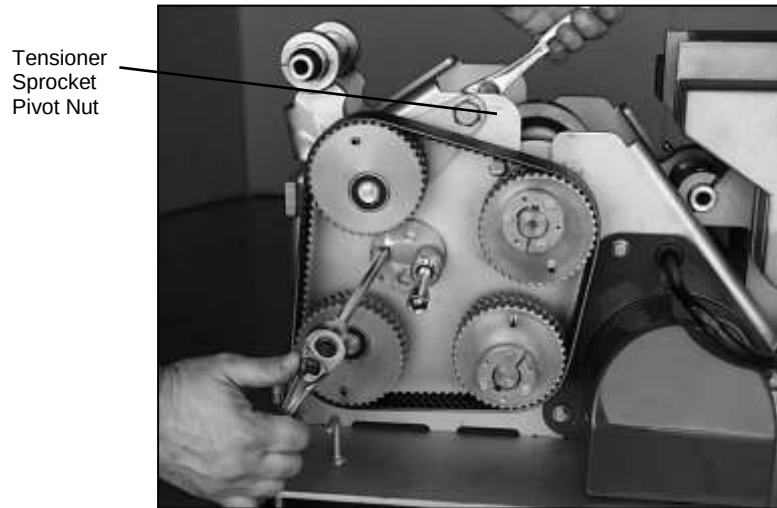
Tightening the Tensioner Sprocket Pivot Nut
